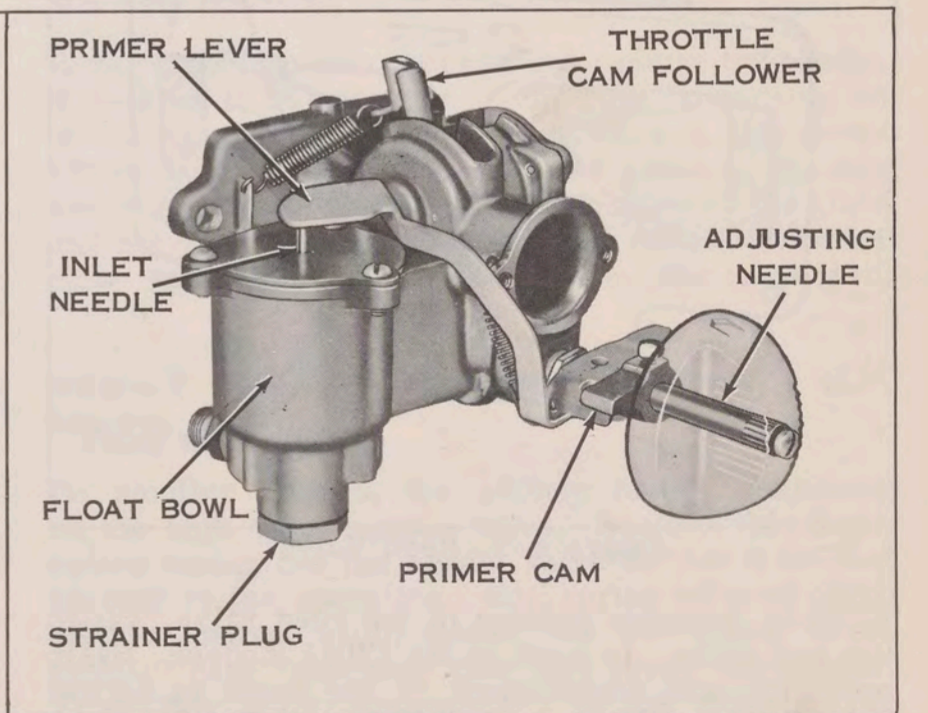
Carburetor for 3D10 and 3D11 Motors
